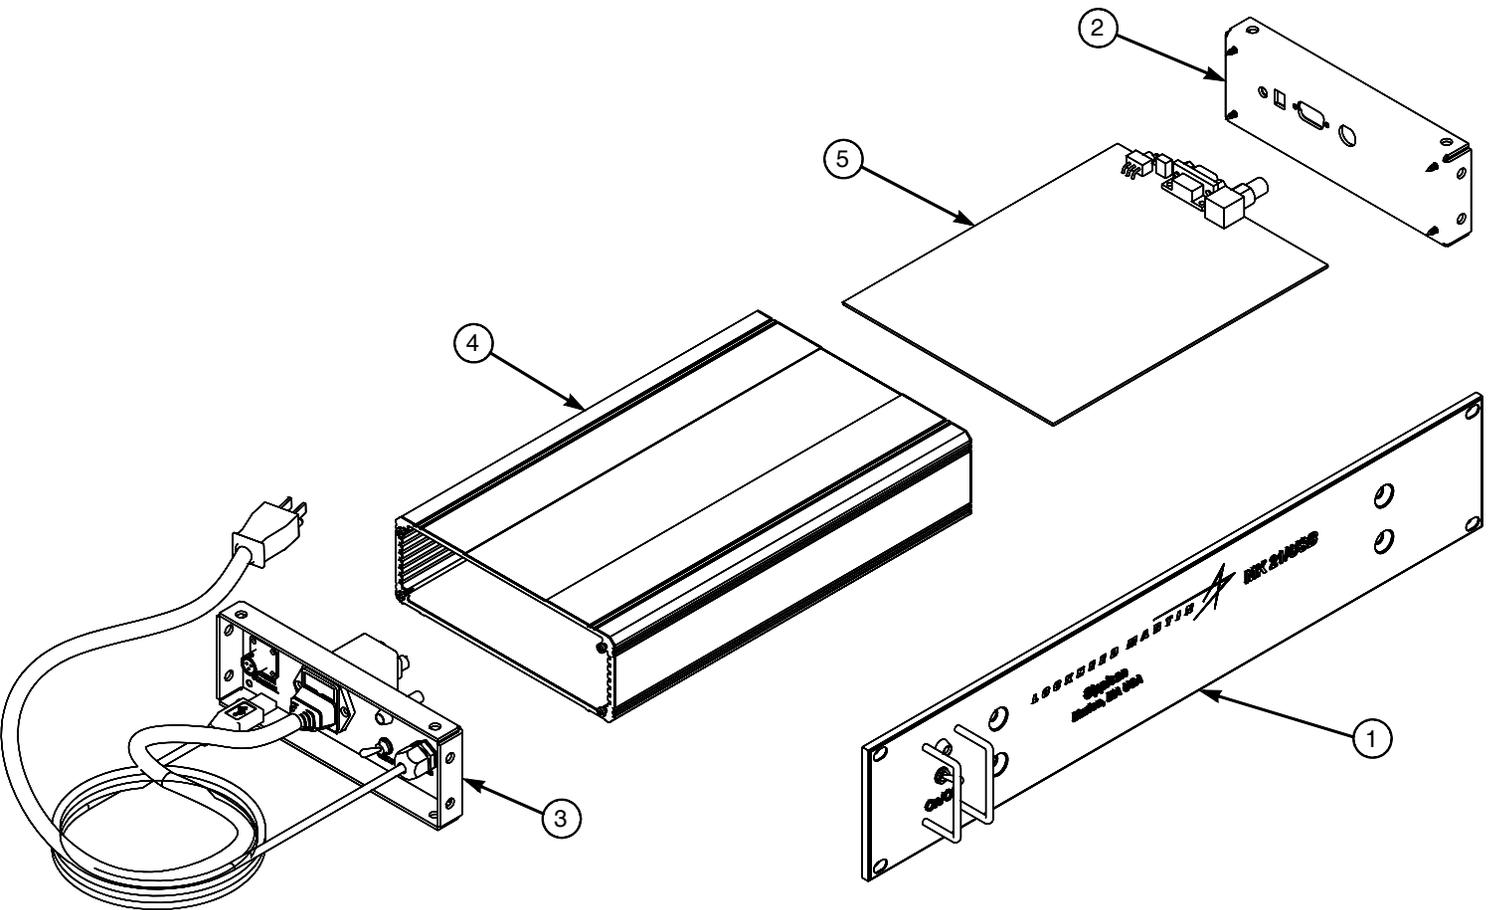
MK21 USB DAQ Replaceable Parts—Exploded View
